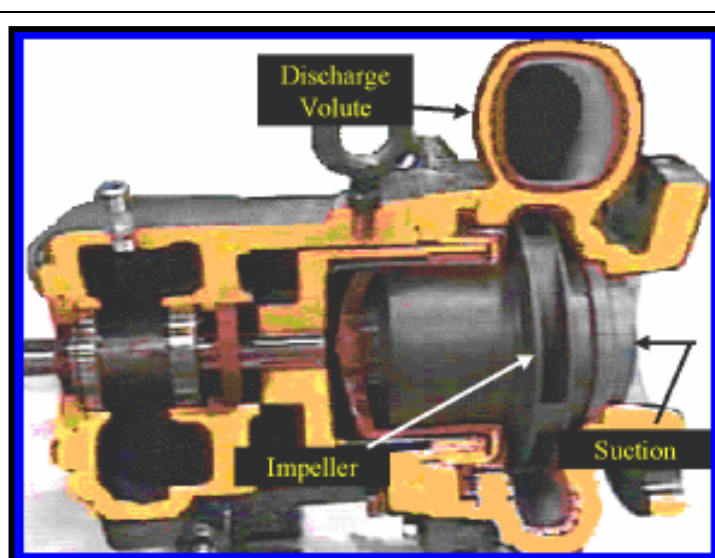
Cut-away of a pump showing Volute Casing (Sahdev)
